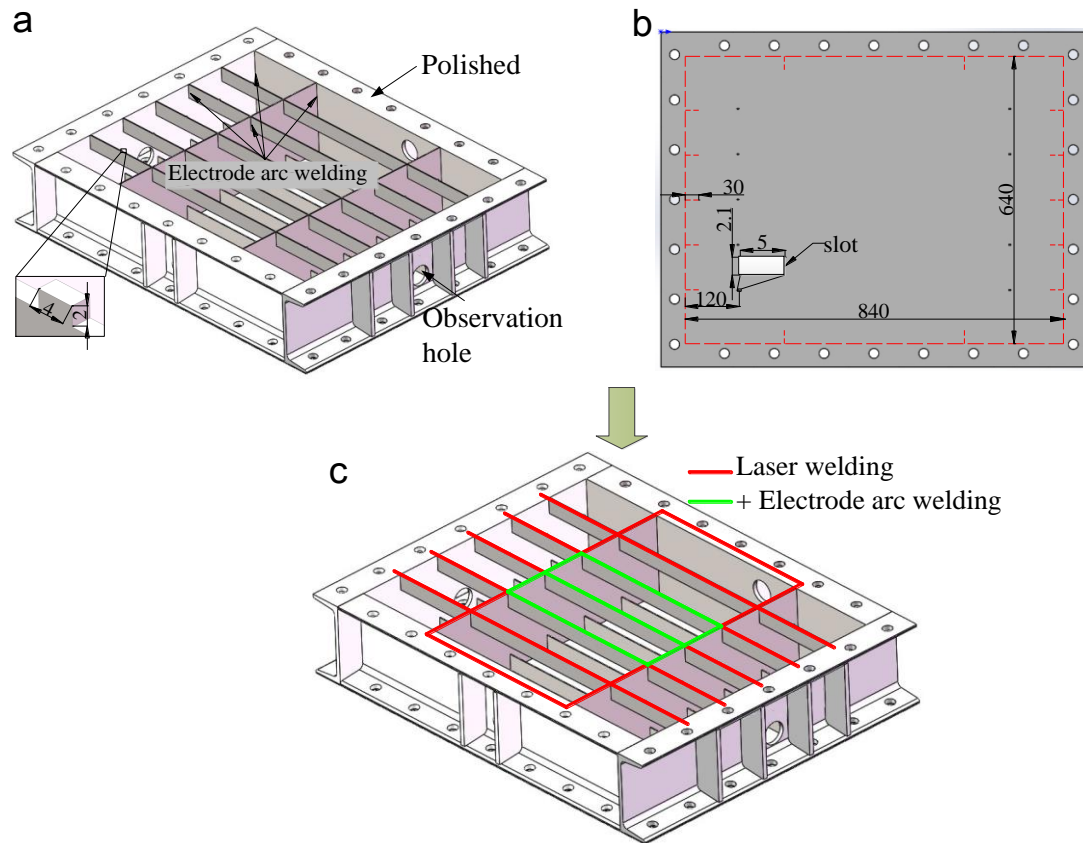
Specimen fabrication process: (a) inner components and surrounded frame are welded by electrode arc welding, (b) laser marking and slot cutting on side plates, and (c) panels and inner components together with the frame are welded by laser welding, and specific locations are strengthened by electrode arc welding.
